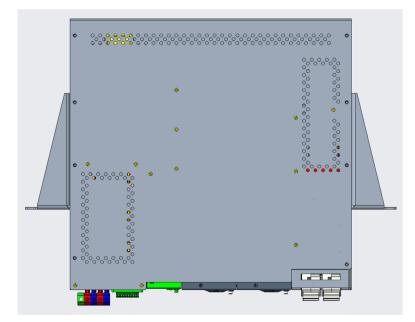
Isometric View: Solar Add-On Shelf with 23-inch Mounting Brackets
